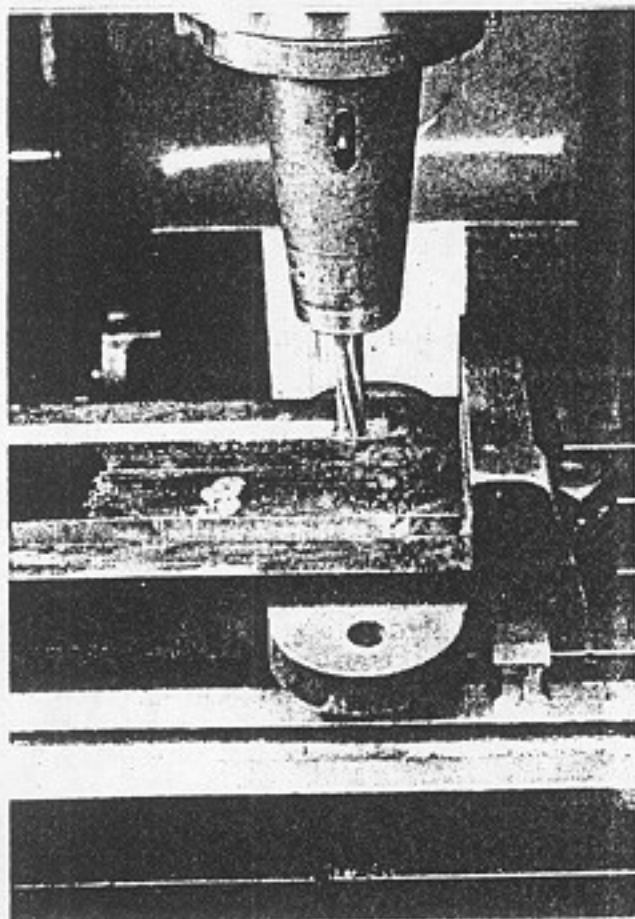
The shank end mill is held in an adapter that fits into the spindle socket of the milling machine.
